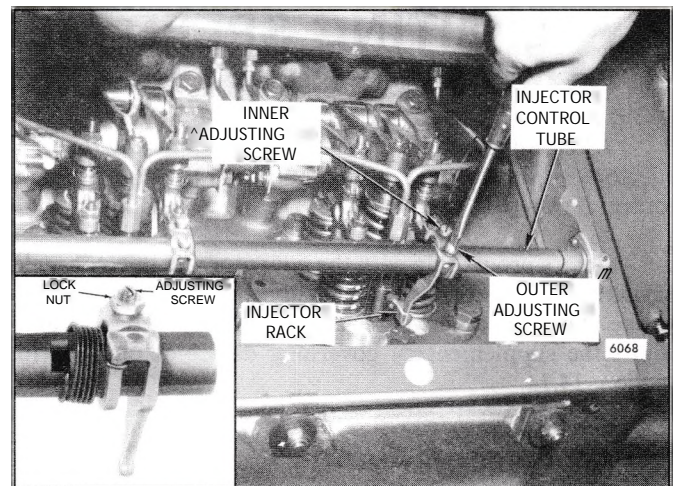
Positioning No. 1 Injector Rack Control Lever
